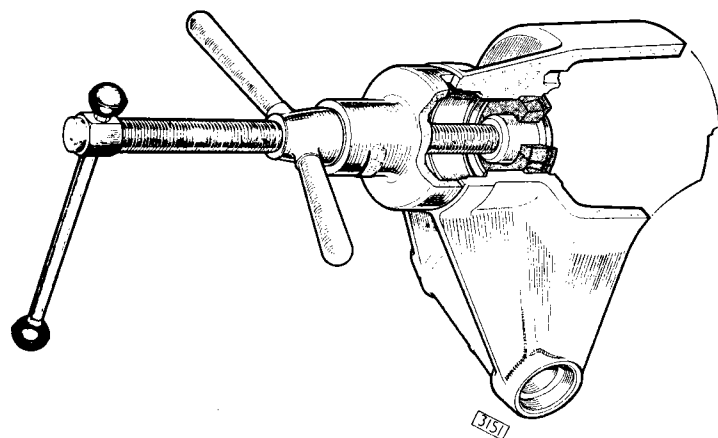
Replacing the hub bearing outer races using Churchill Tool No. J.20A with adaptors J.20 A-1
